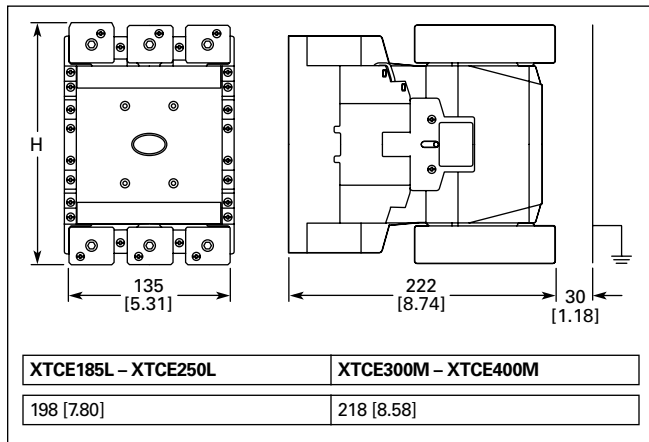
XTCEXTLA — Approximate Dimensions in mm [in]
